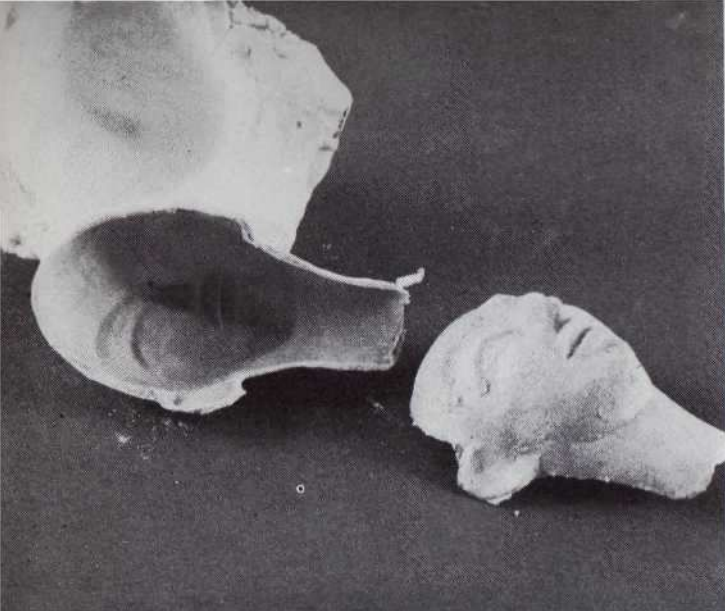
Removing the plastic wood shell from its rubber mold and plaster support
